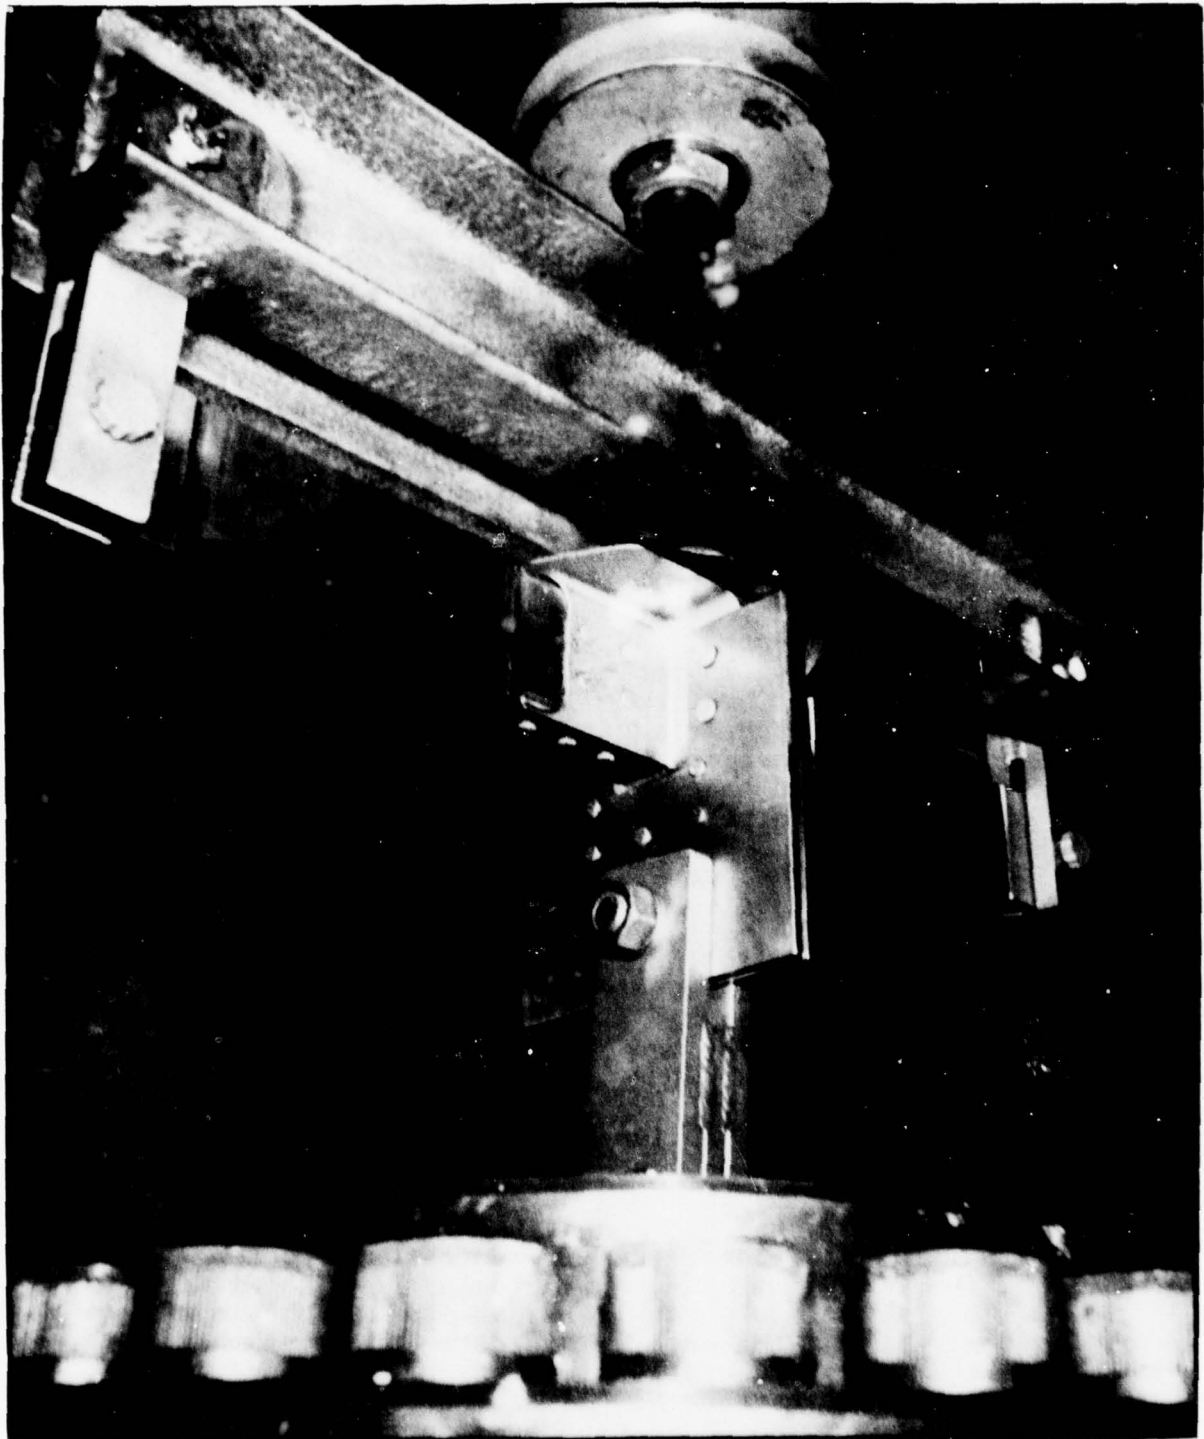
Set-up for spectrum fatigue testing of forged and hot isostatic pressed keel splice formers 68A333019-2007.
